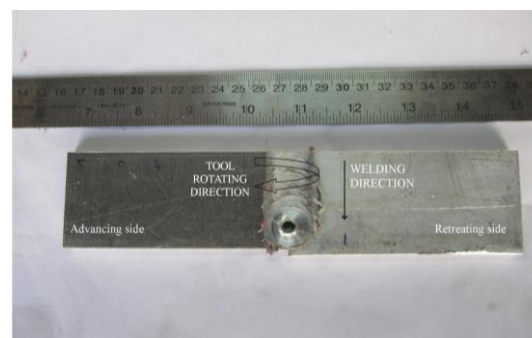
Friction Stir Welded plates AA2014 & AA6063
